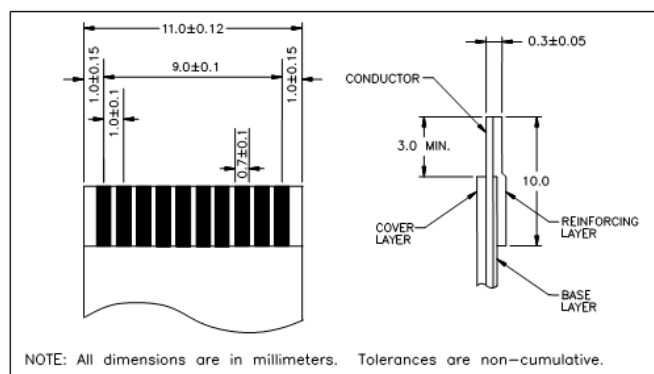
10-pin, FFC/FPC Lead Section Dimensions
